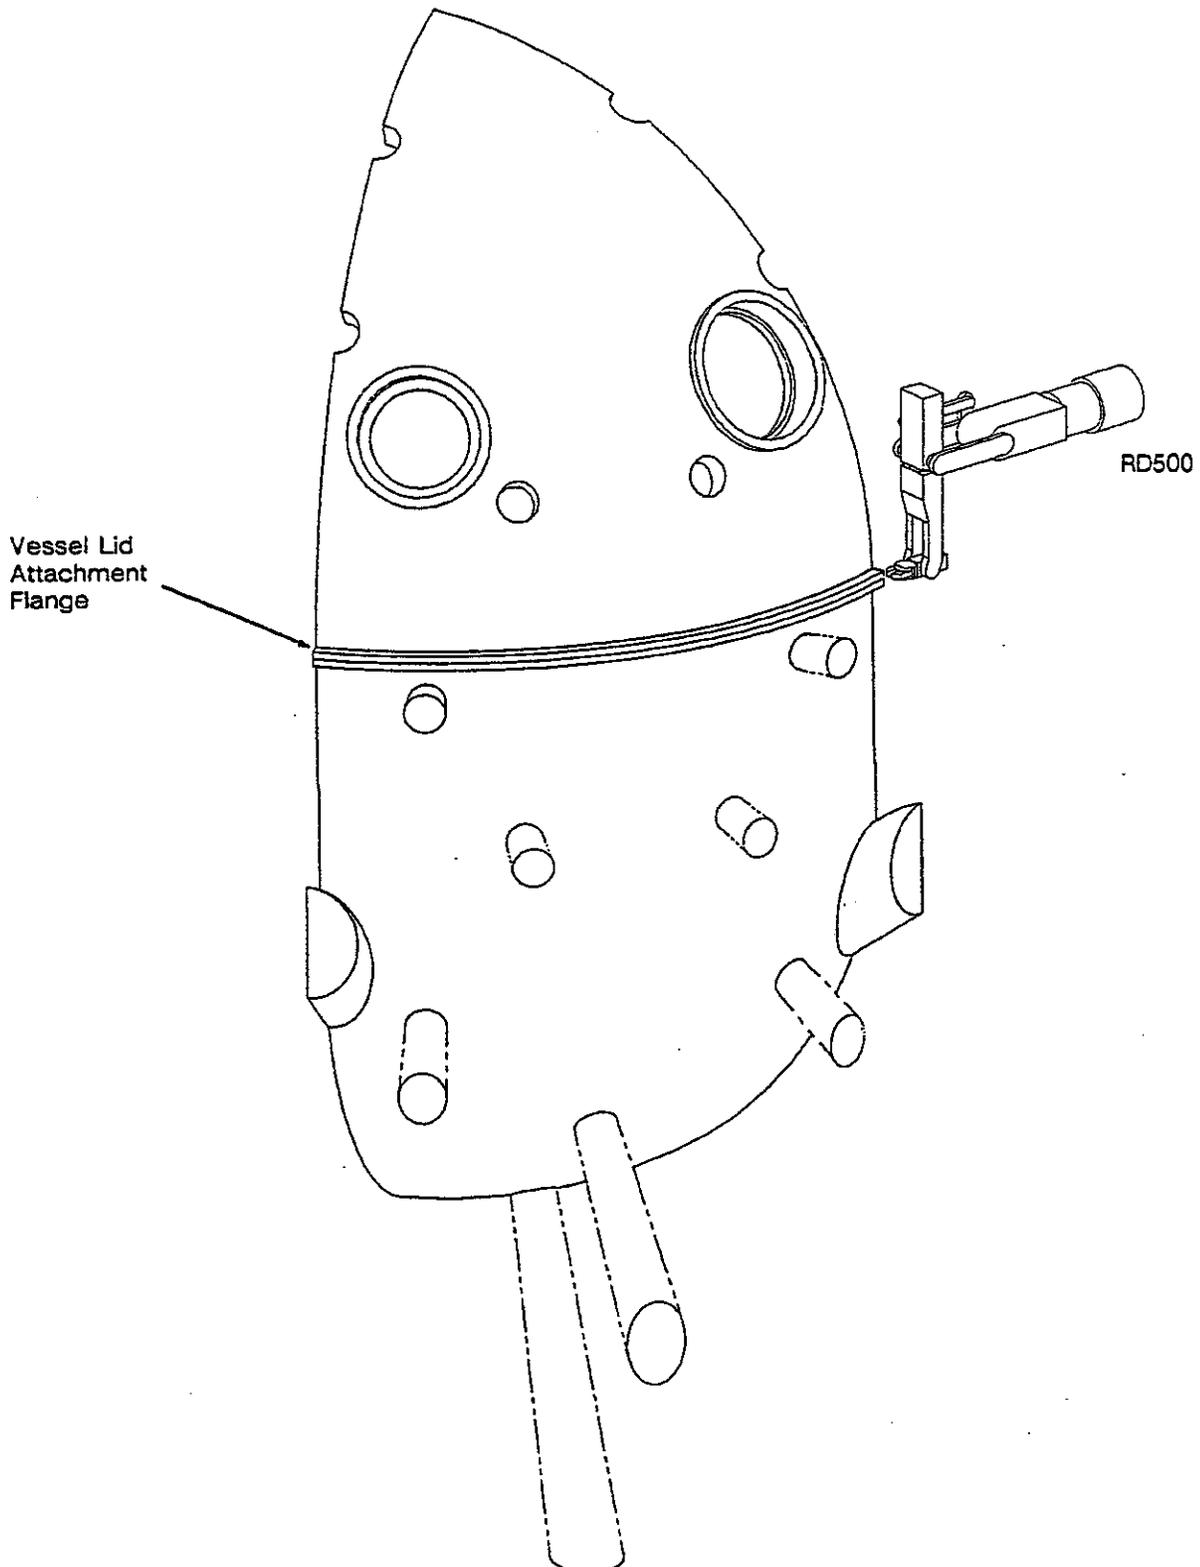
Remote Manipulator Working on Vessel Lid Attachment Flange
